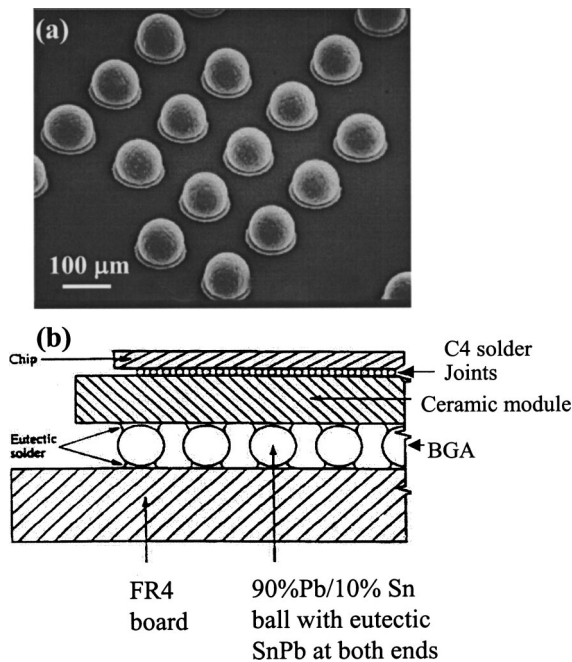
(a) Area array of solder balls on a Si chip surface (courtesy of W. J. Choi, UCLA). (b) Cross section of two-level packaging: chip-to-ceramic module and ceramic module-to-polymer board, where C-4 solder joints are controlled-collapse-chip-connection solder joints and BGA is ball-grid-array (after Ref. 3).
